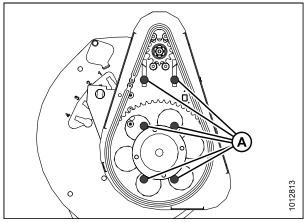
Single-Reel Drive Shown – Double Reel Similar
